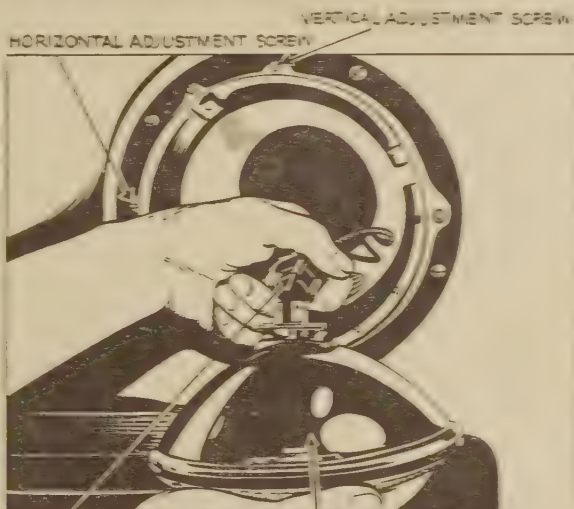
Replacing Headlight Sealed Beam Unit (Kaiser-Frazer).
